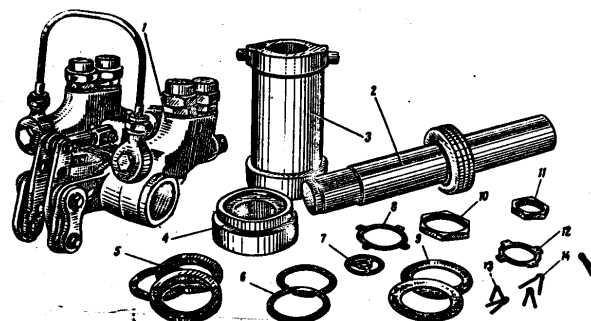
Units and Parts of Hydraulic Booster 5Y-105
